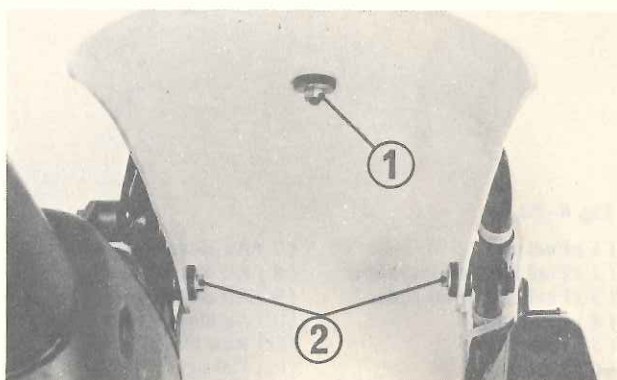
(1) Taillight bolt (2) 6 mm bolts
